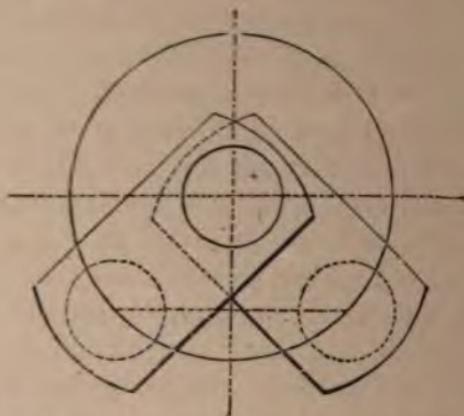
Position of the Cranks for the Inspection of an Engine.
